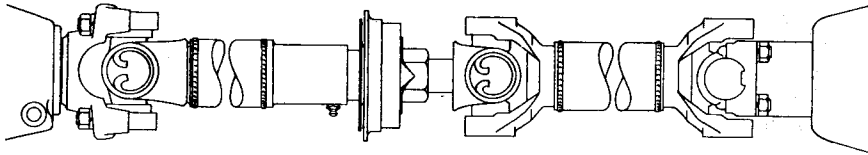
METHOD OF ASSEMBLING DRIVE LINE
